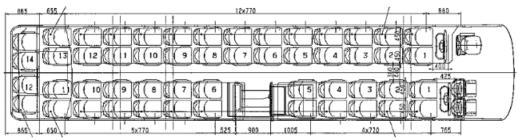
Typical Room Layouts of High Decker Coaches [41]
